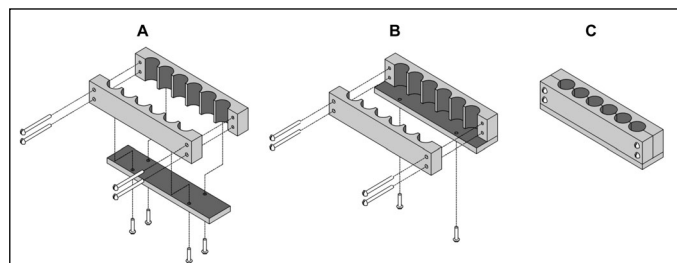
Schematic illustration of the accessory built for including rats' distal femoral portion into acrylics. (A) Disassembled accessory. (B) First assembly for gluing and alignment of femurs. (C) Assembled accessory.
